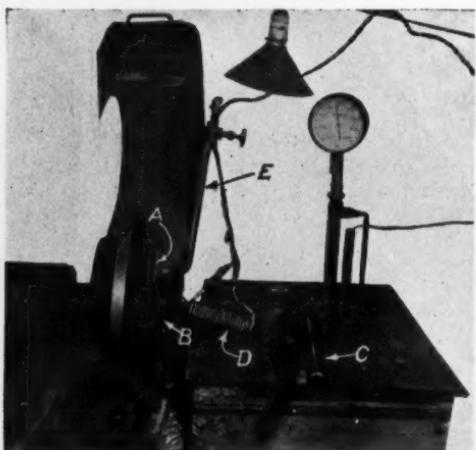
Babbitt bearings are cast into the connecting rods by the centrifugal process, using this equipment.
